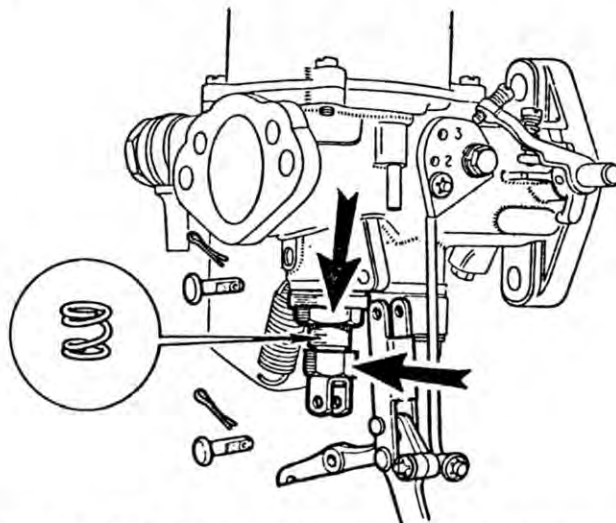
Parts to be disconnected prior to jet centering. Jet locking screw is at upper arrow, adjusting nut at lower one. Note cam-type fast idle control (not T Type).
